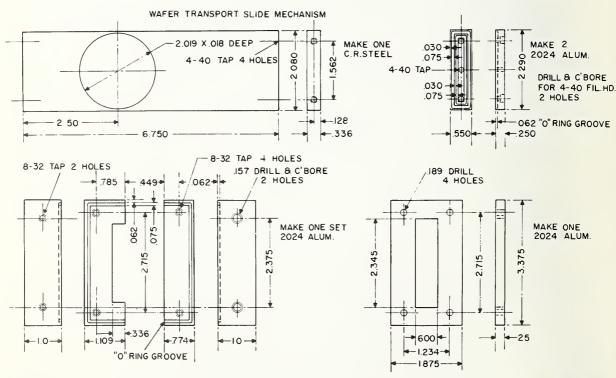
Mechanical drawings for components of the wafer transport slide mechanism.
